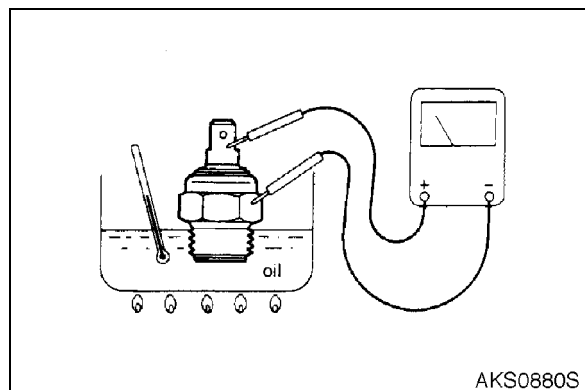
INSPECTING TEMPERATURE GAUGE UNIT
